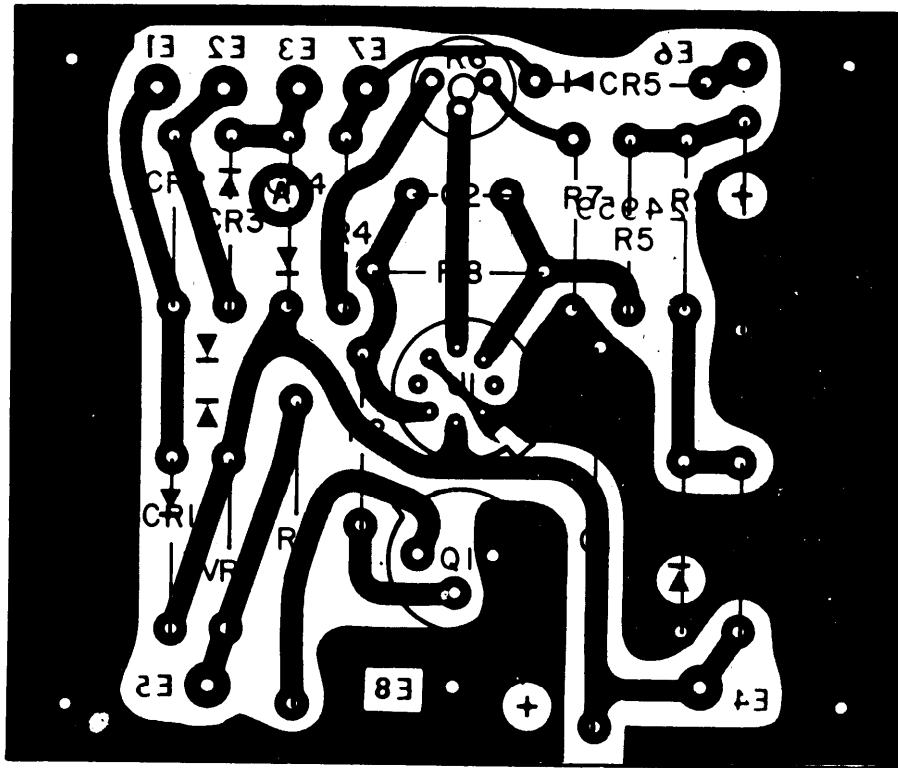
Part 24959 Regulator Assembly (A1),
